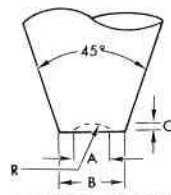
Explosive Rivet — Heat Detonator Tool (Sheet 1 of 2)
